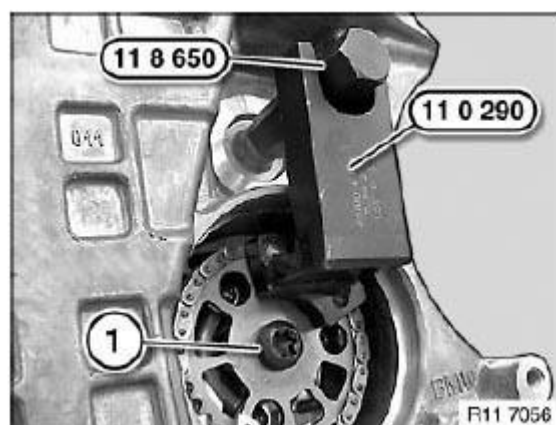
Positioning Special Tool 11 0 290 On Sprocket Wheel And On Special Tool 11 8 650
